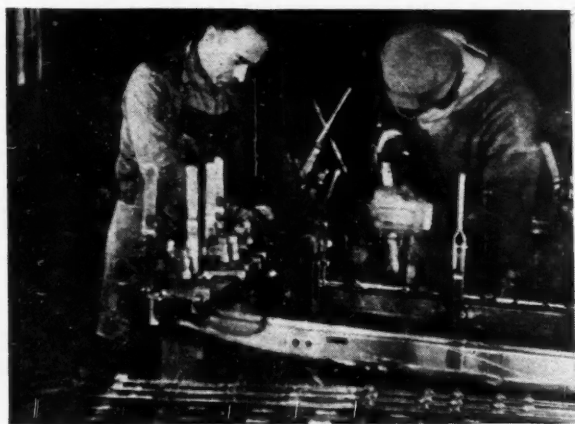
When the outer side panel is completely fabricated it is assembled with the inside frame on a steel fixture
